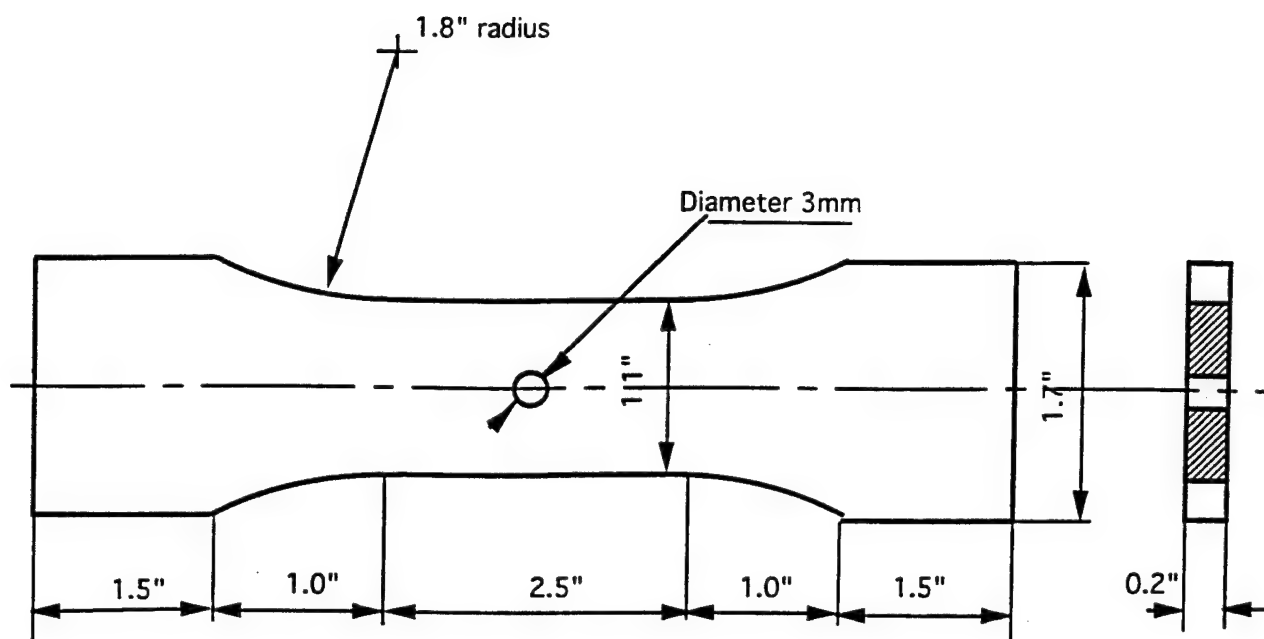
Dimensions of flat fatigue specimen with a center through hole.
